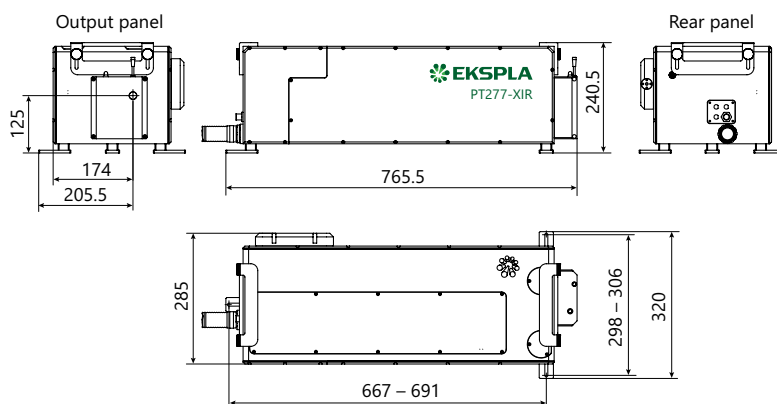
External dimensions of PT277-XIR and PT277-SI laser units (the same external housing)
